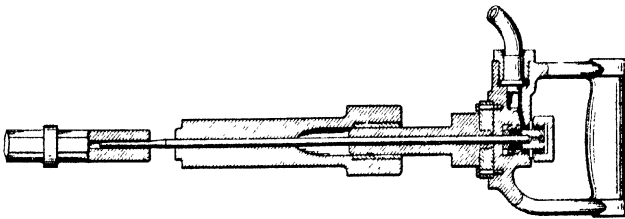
Ingersoll-Rand "Water Jackhammer," for Wet Holes.
